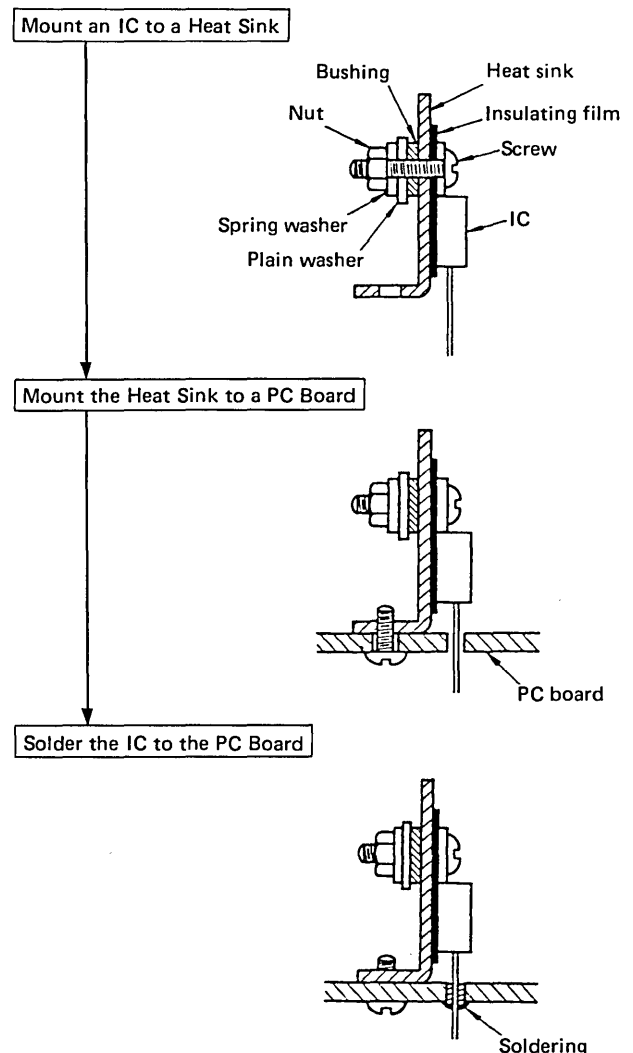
Procedure for Mounting an IC to a Heat Sink and a PC Board
